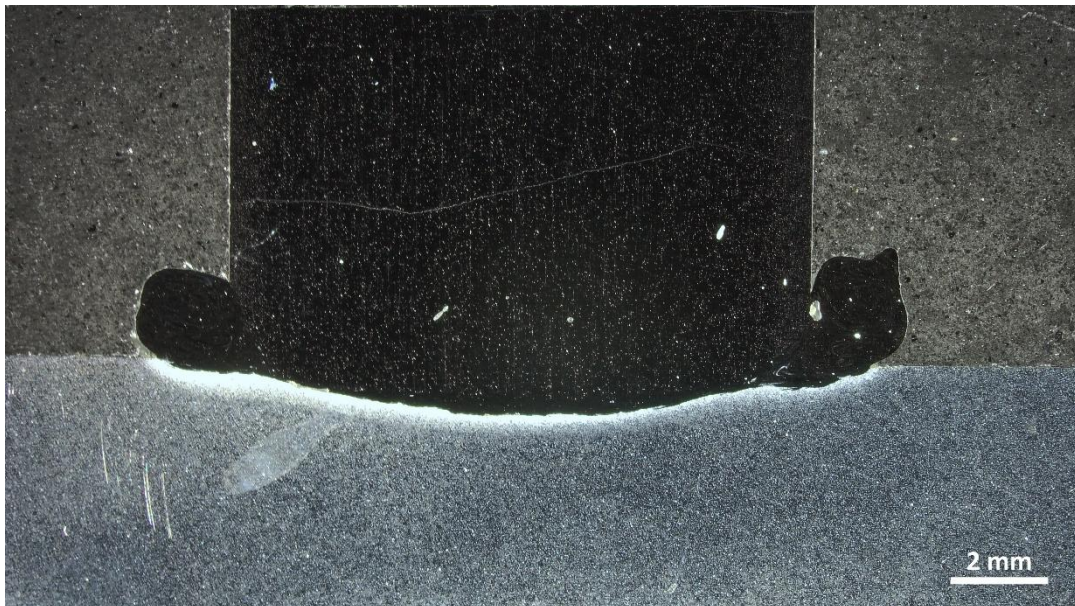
Macrostructure of the welded joint No. 2
